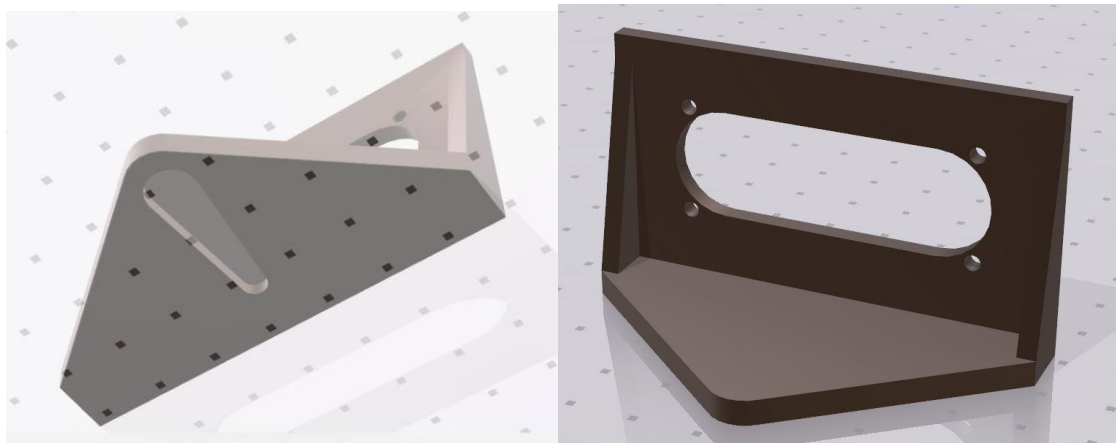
Clamp (Left) Bottom view shows the slot of servo arm (Right) Back view shows the slot for range finder module.
